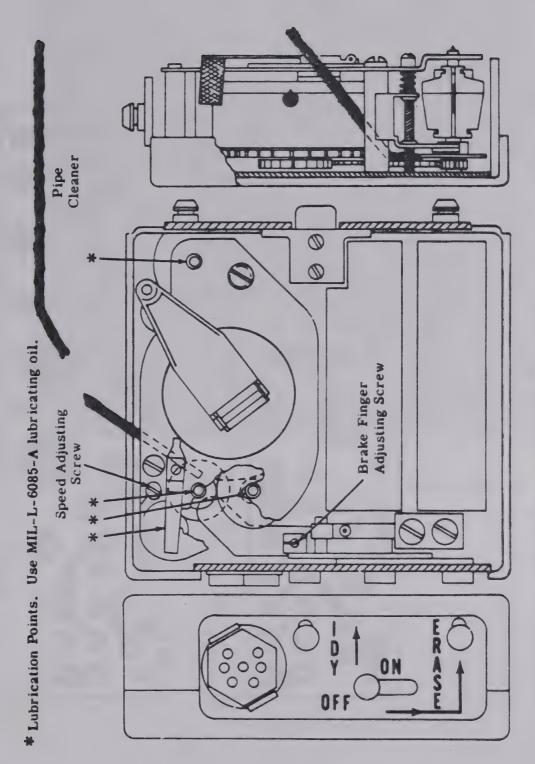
KE-8B Keyer brake disc cleaning and lubrication points.
